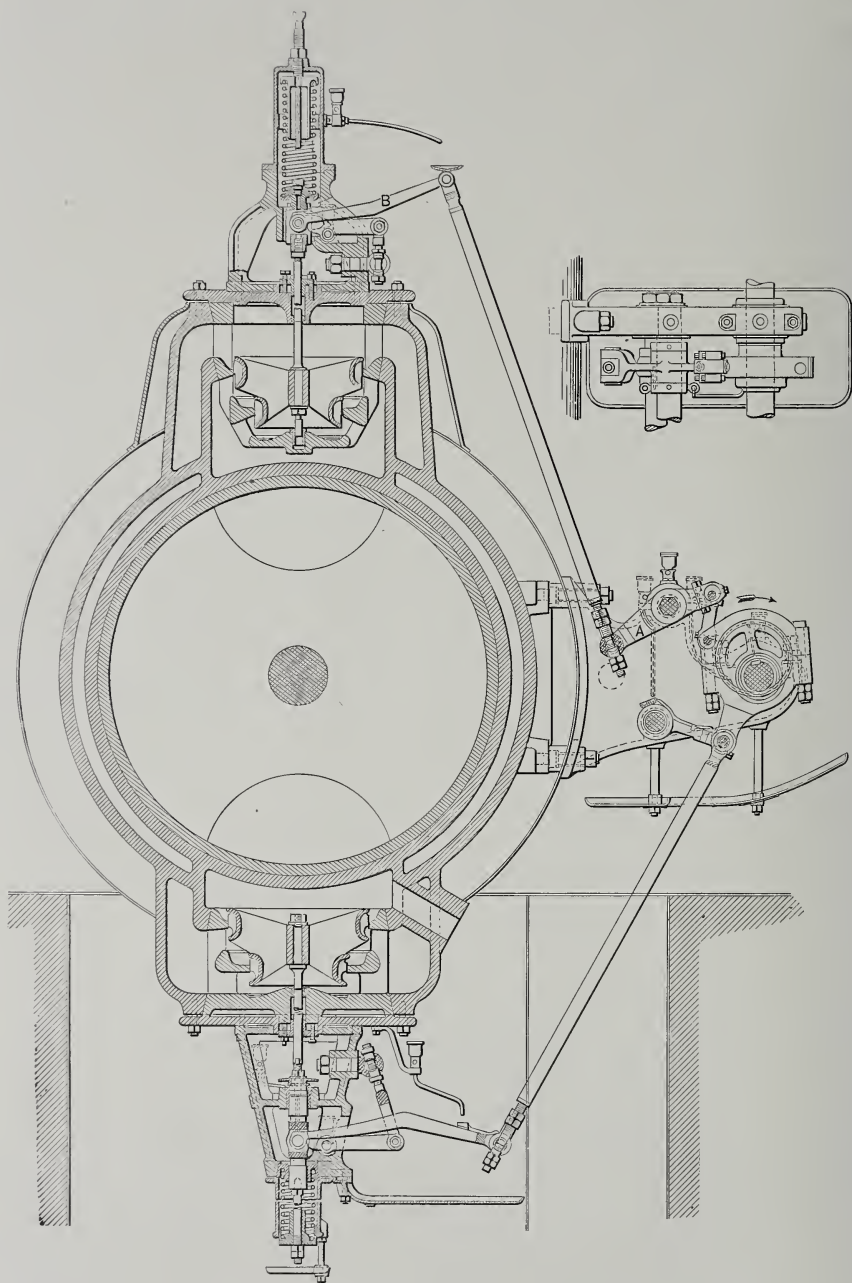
THE VALVE GEAR OF THE SULZER ENGINE, MADE BY MESSRS. SULZER BROTHERS, WINTERTHUR, SWITZERLAND
